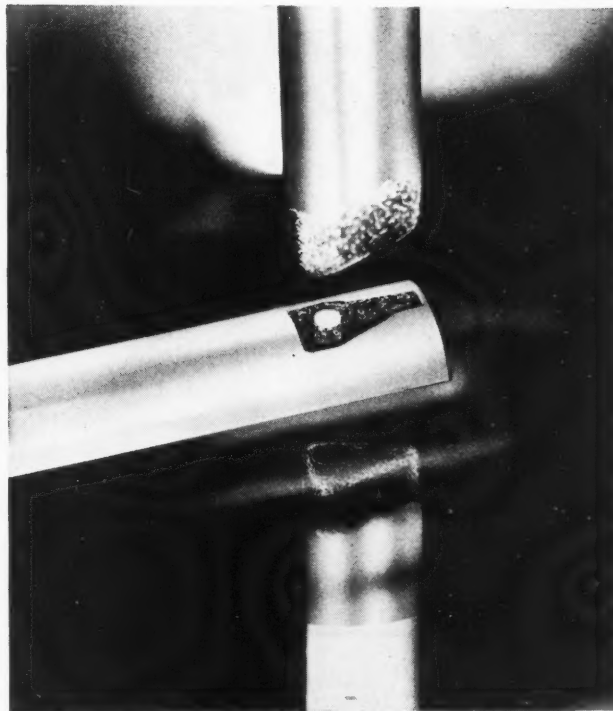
A blind, triangular-shaped hole having an integral pin was produced in this work-piece. The electrode is seen reflected in the dielectric fluid below the hole in the work
